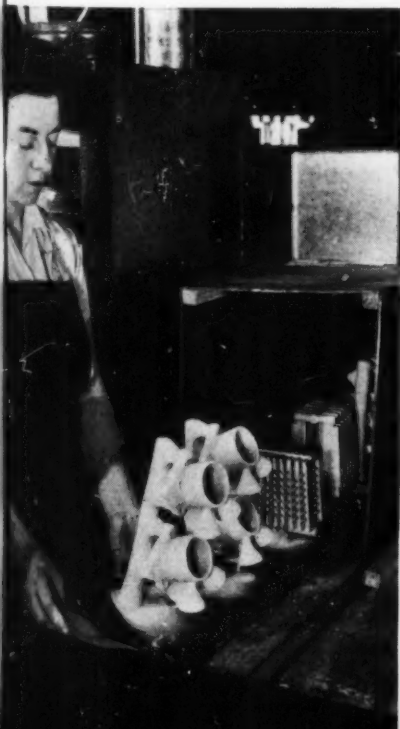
Right Above—Master soft-metal mold with corepiece and wax patterns being produced on typical injection press
